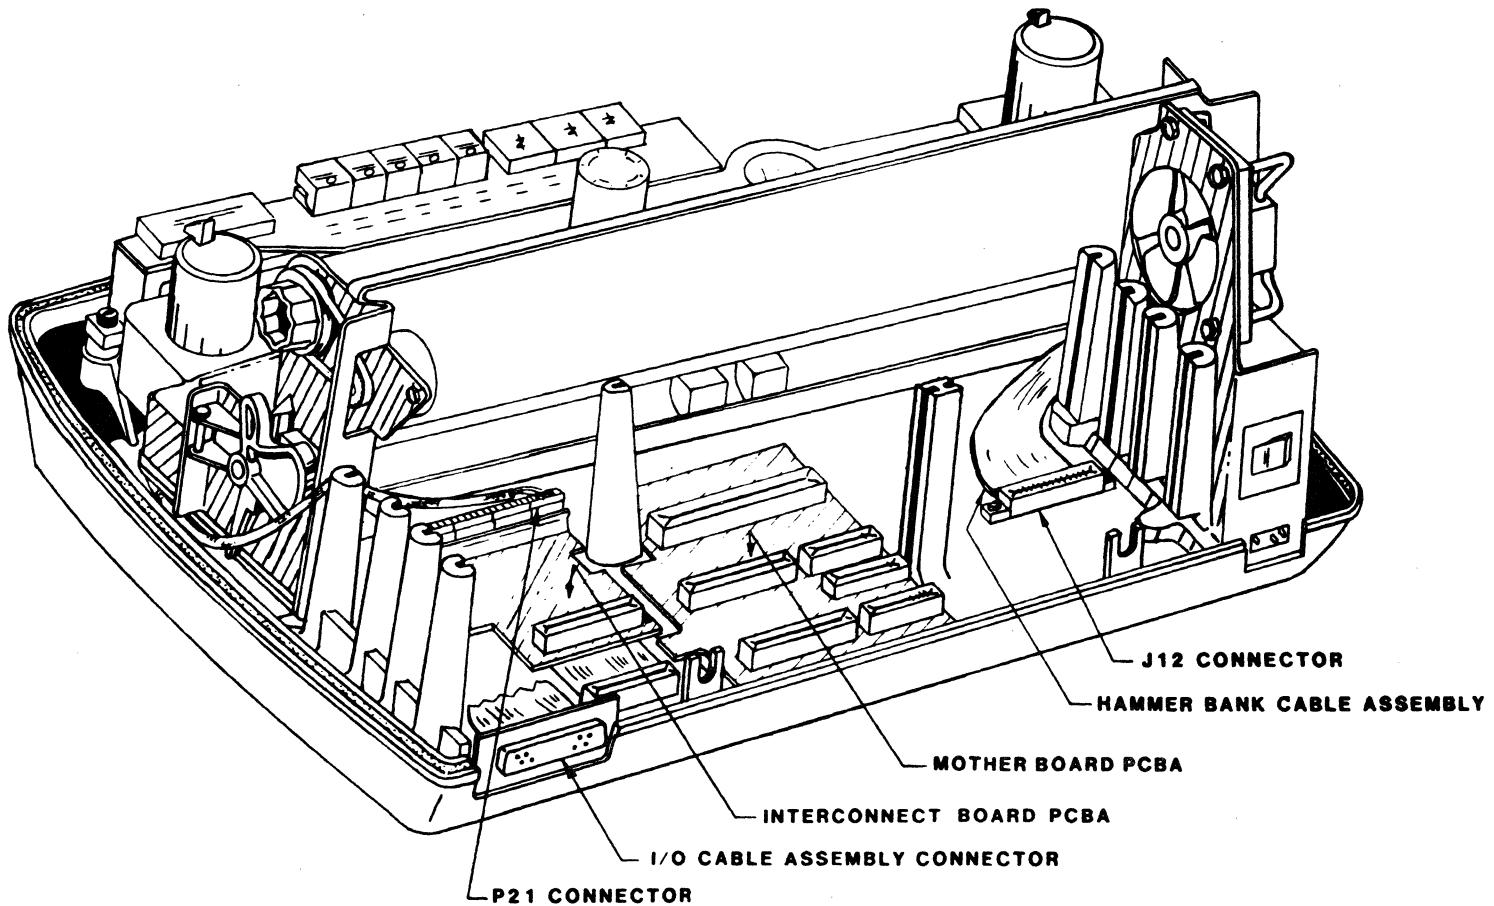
Rear View of Printer, Major PCBA's Removed
